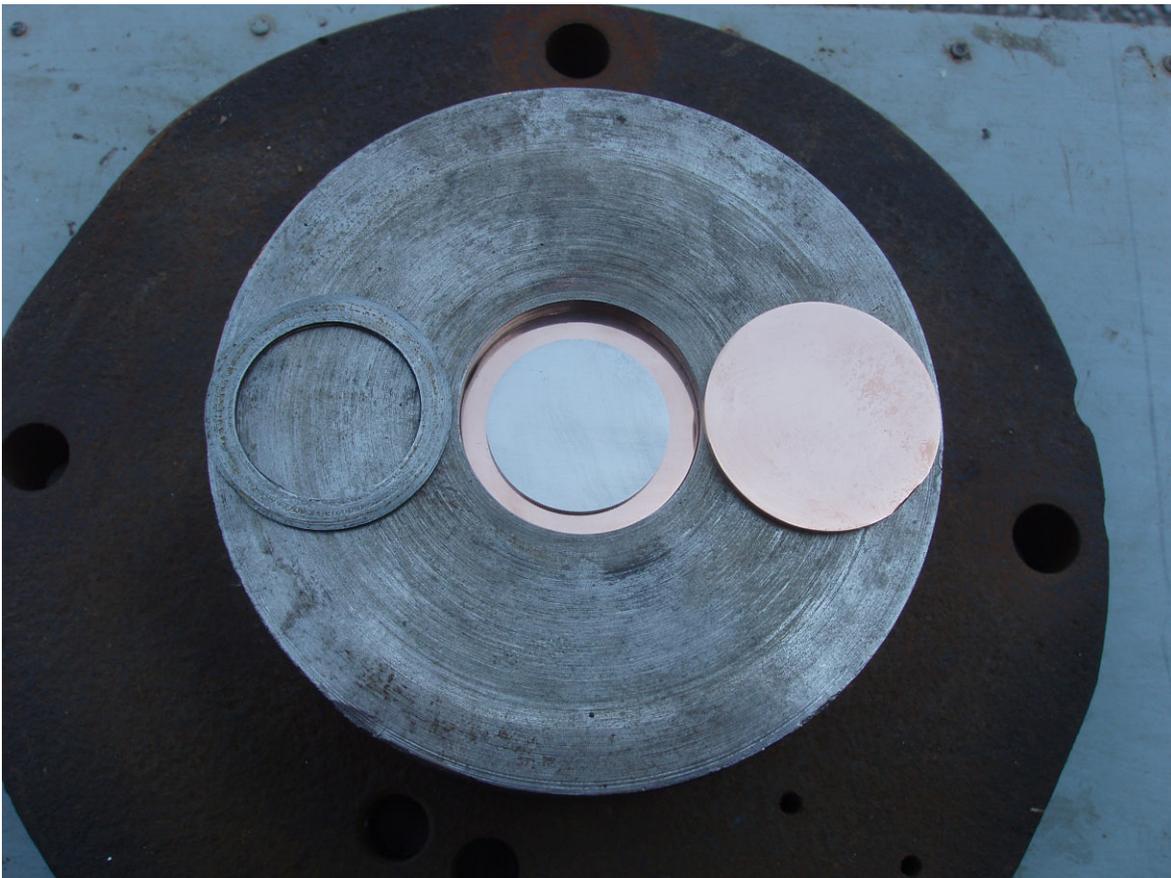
Components of a nested experimental setup prior to assembly for welding. 1 – back support, 2 –rear copper plate to be welded, 3 –middle layer to be welded (nickel alloy coin), 4 –separation ring, 5 –fastener, 6 – impact side copper plate to be welded.
